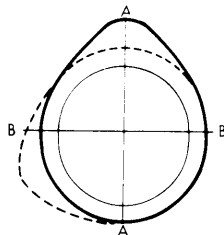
Measuring Camshaft Base Circle and Lobe Lift
